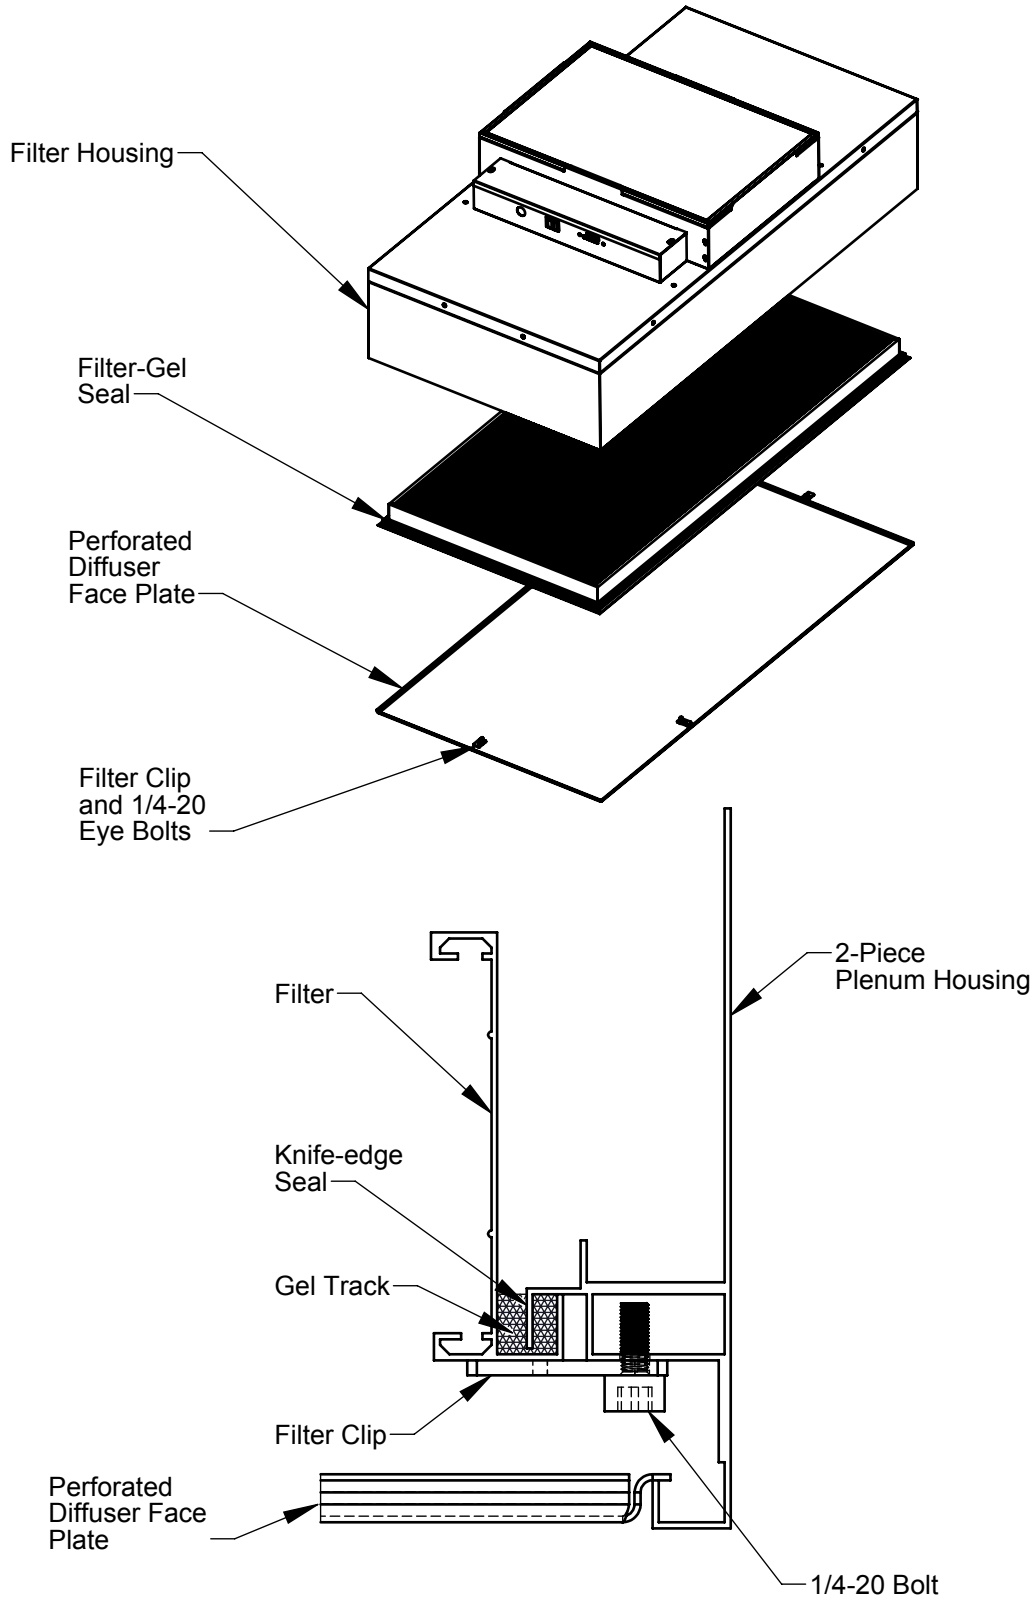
RSR Filter Replacement (Sheet Metal Construction)
